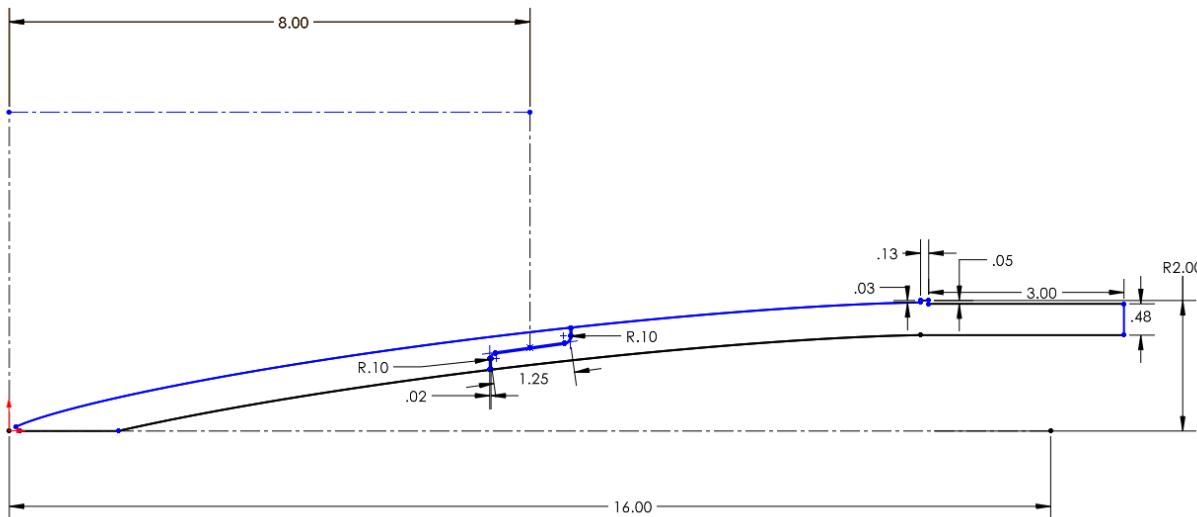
SolidWorks sketch of nosecone with dimensions.
